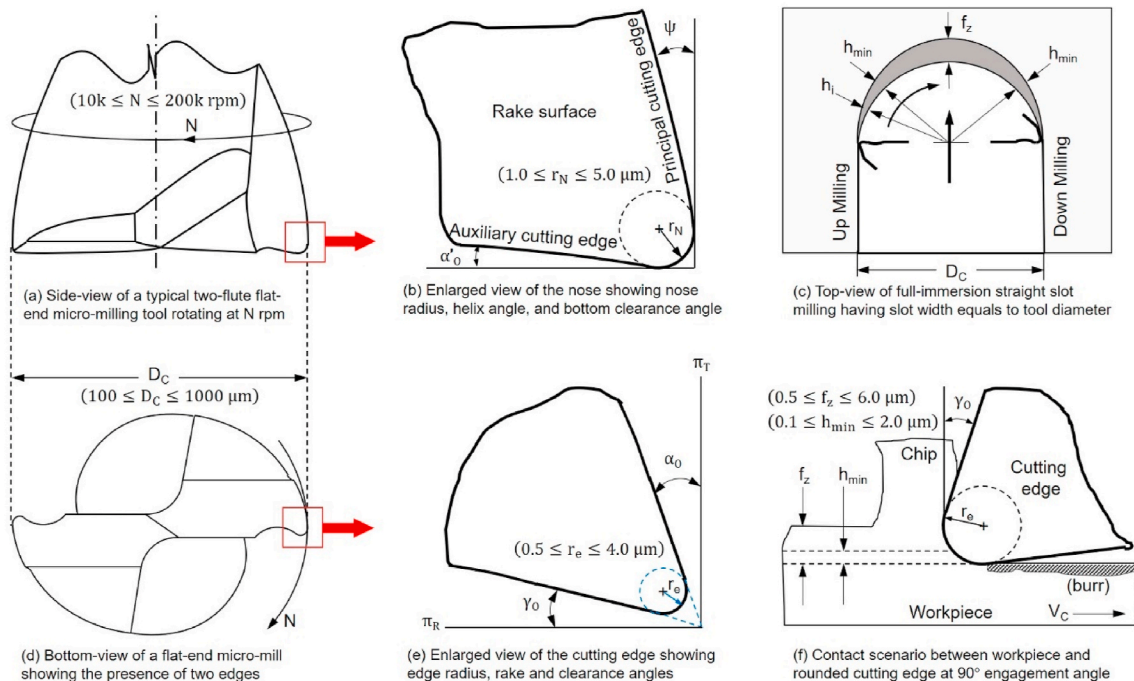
Schematic representation of crucial geometrical features of the micro end milling tool as well as the tool-workpiece engagement scenario for full-immersion straight slot milling (typical range of various parameters is also provided).
